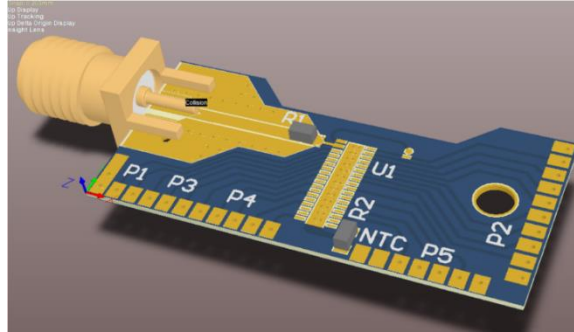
Three-dimensional picture of designed subcarrier PCB.
